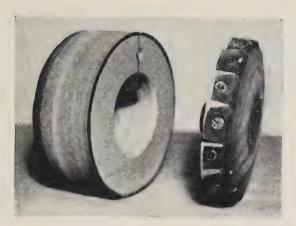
Sanding Drum (Left) and Sanding Disc (Right), Demounted to Show Details.
